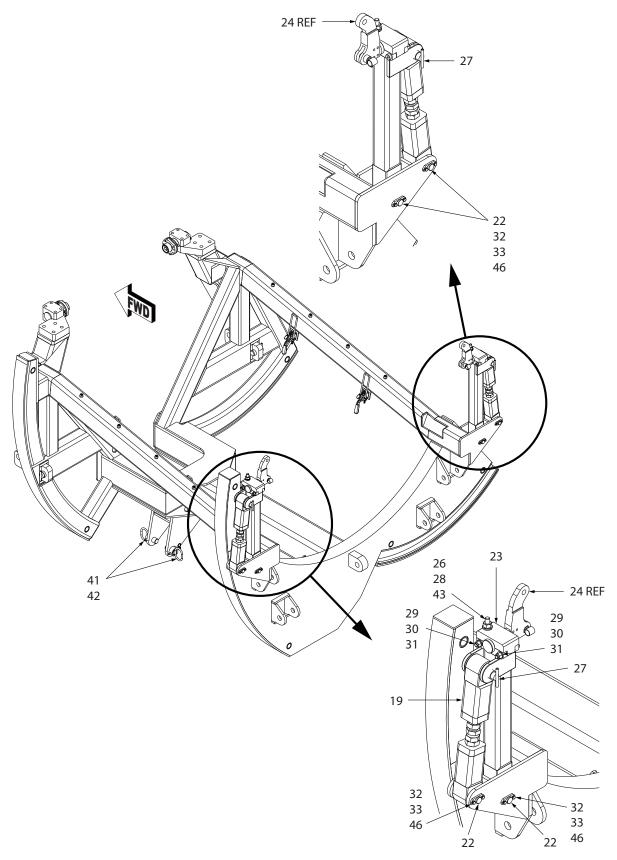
AGSE-E16607-S02 Cradle Assembly
